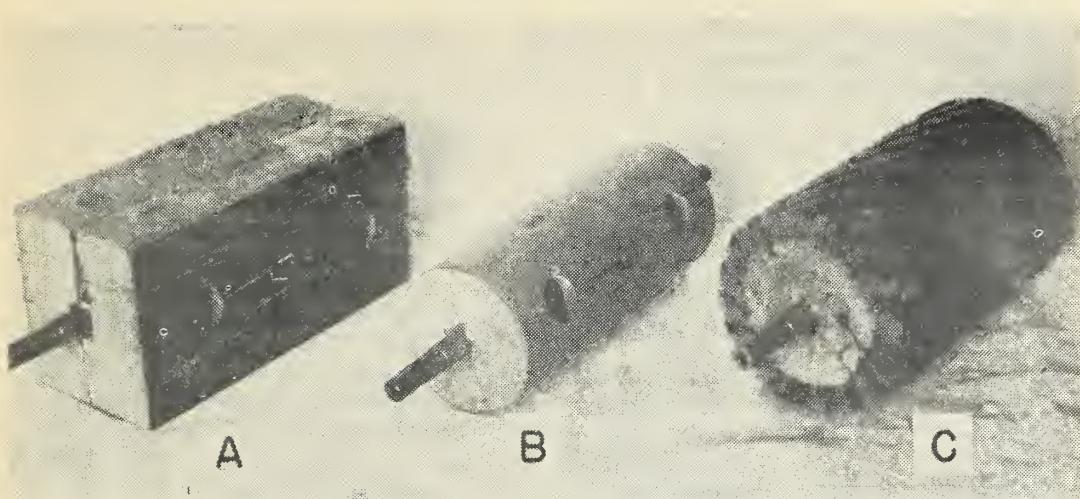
Stages in construction of a 16-inch roller; (A) shaft and block assembly, (B) core after turning down in lathe (holes yet to be plugged) and (C) after covering with walrus hide.
